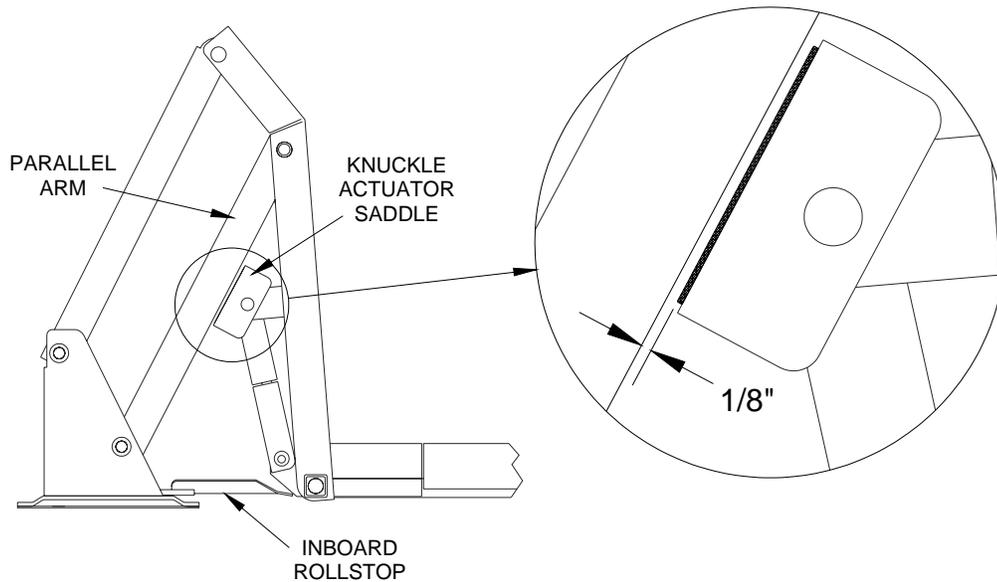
KNUCKLE ACTUATOR SADDLE MINIMUM CLEARANCE
